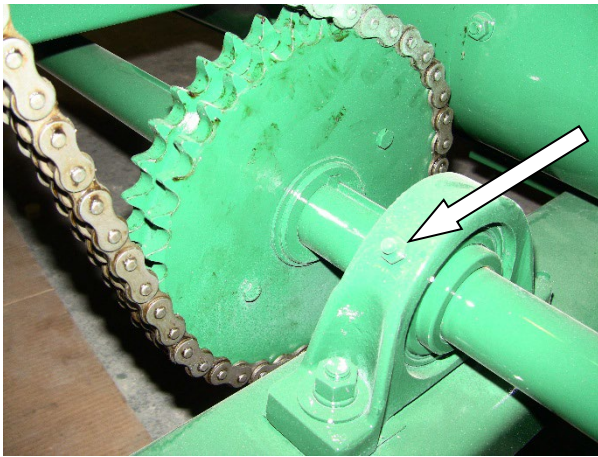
Mixer Drive Shaft Bearing, Rear (Shield Removed For Clarity).
